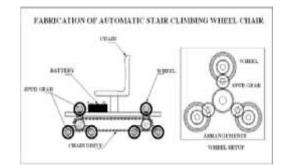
Schematic sketch of gear assembly and Wheelchair.[3]
